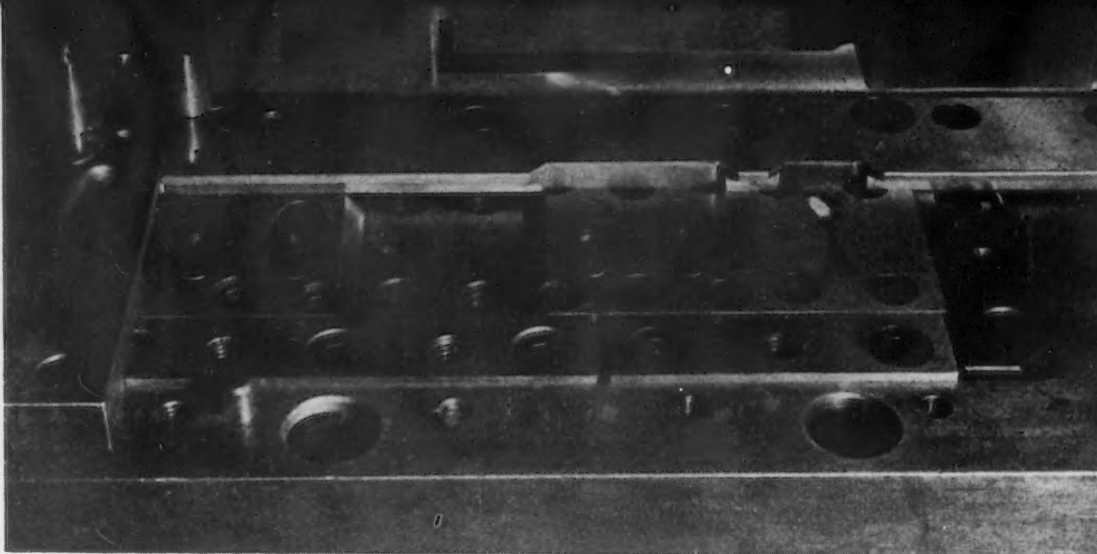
Close-up of lower portion of the progressive die. At upper left is the punch that transfers the finished stamping to the dial, which is hidden below the die.
